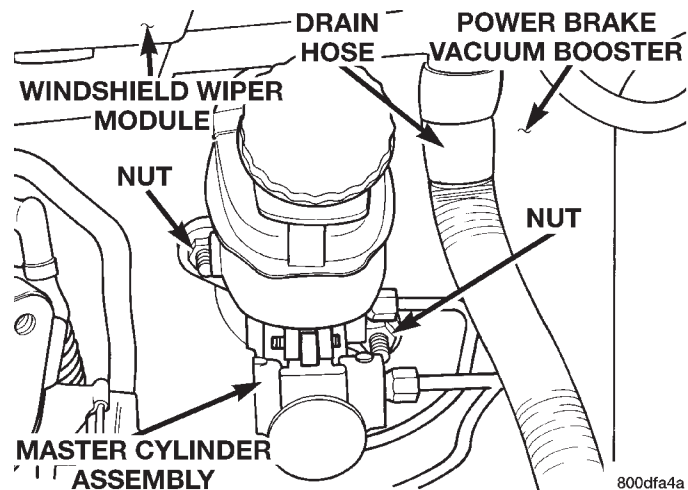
Master Cylinder Attachment To Power Brake Vacuum Booster
